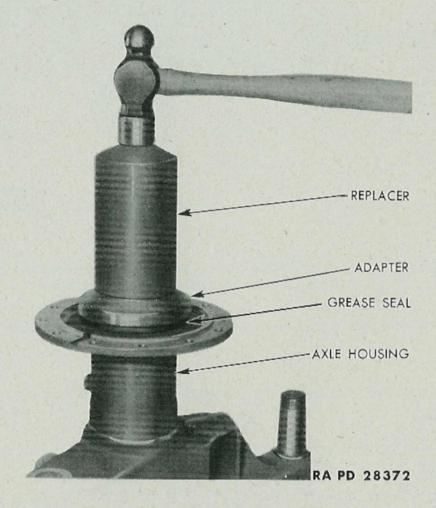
Driving Hub Inner Bearing Grease Seal on Axle Housing with Replacer 41-R-2394-130 and Adapter
